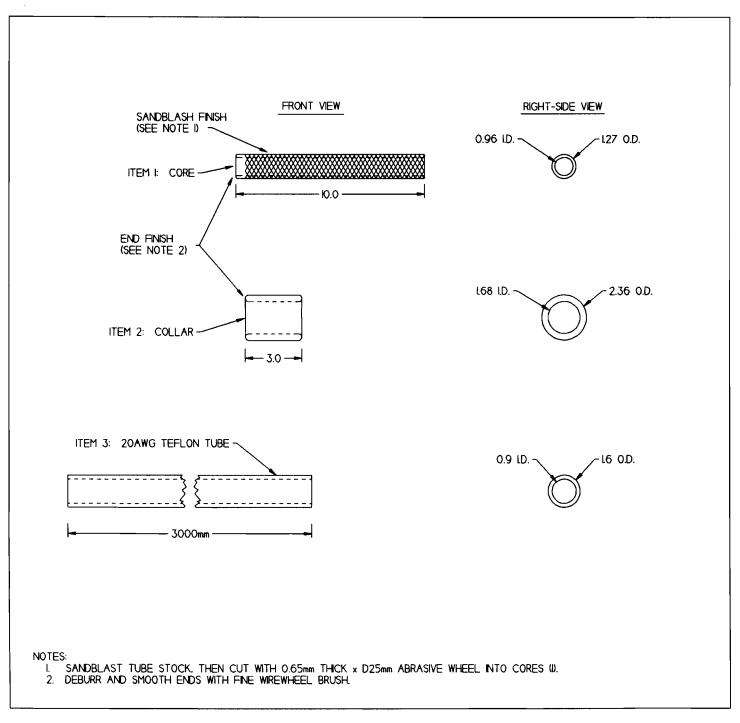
Assembly drawing of tubing adapter to display driver manifold. Drawing TDRV3126-2.
